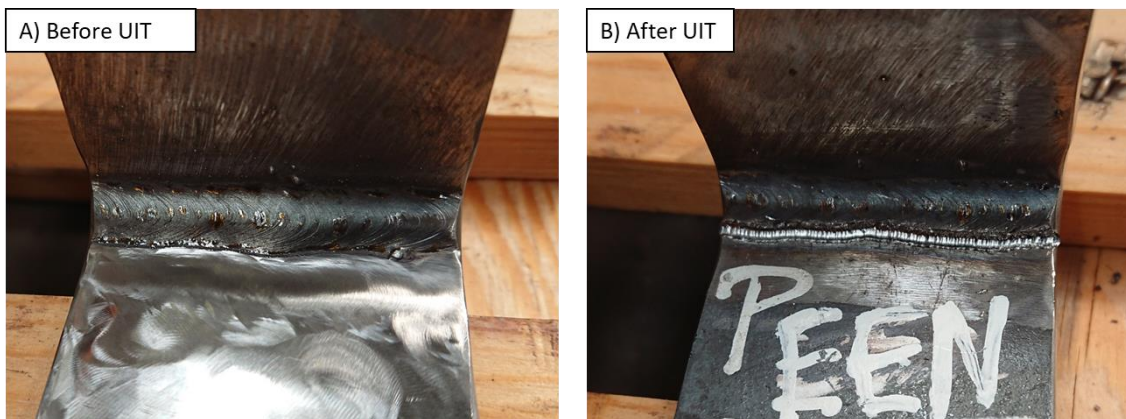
A) image of a weld toe before; B) after UIT
